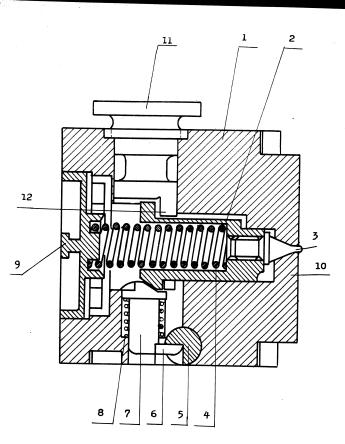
BREECHBLOCK ASSEMBLY SECTION (WITHOUT THE FRONT PLATE)
